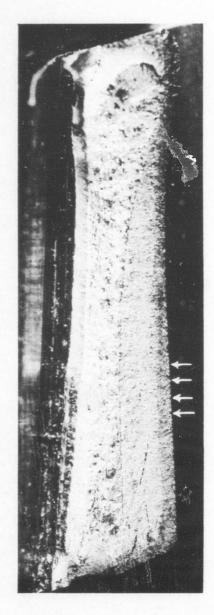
Detail View of Failure Surface, Showing Progressive Failure Originating EX-84117, Serial Number CXD 592 in Multiple Points Along Base of Involute. Tested Tooth Number 1
